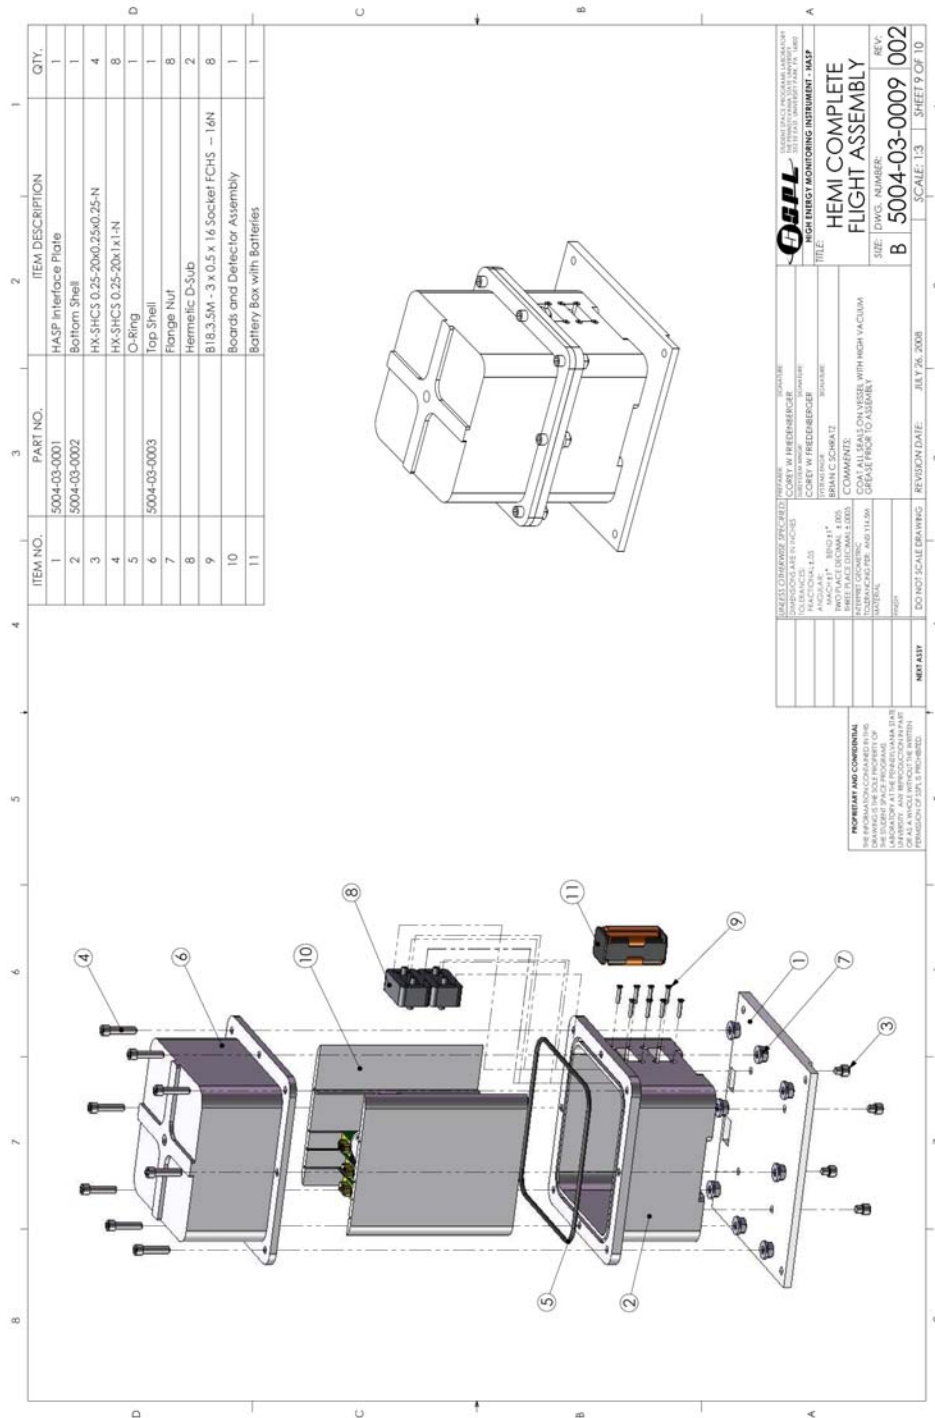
Mechanical Drawing: HEMI Complete Flight Assembly
